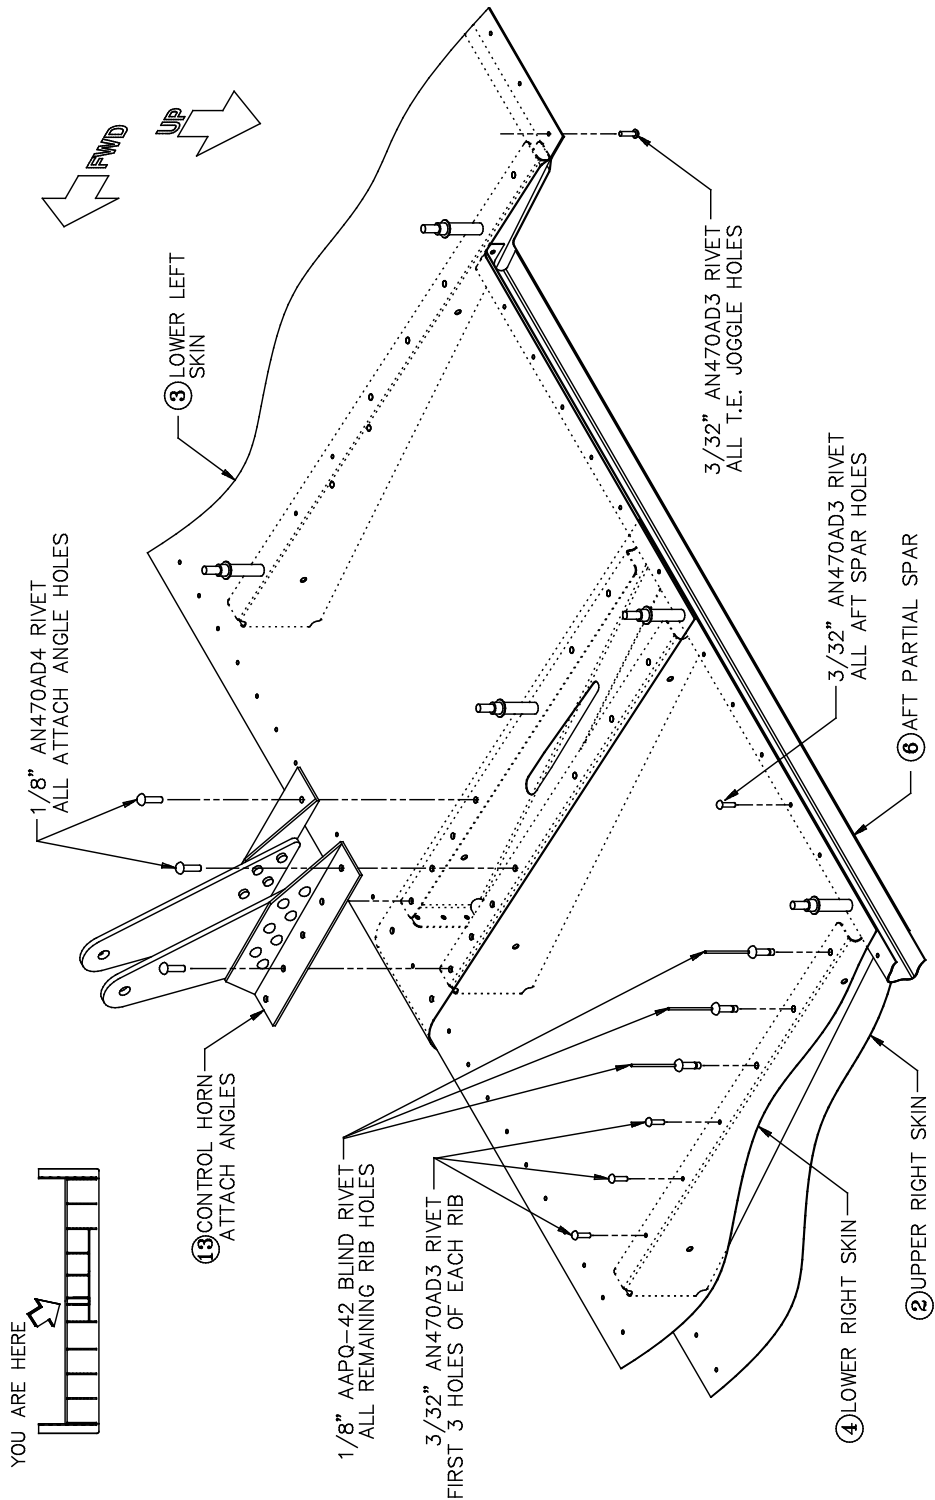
Riveting the Control Horn Assemblies and Lower Skins to the Ribs and Aft Partial Spar
